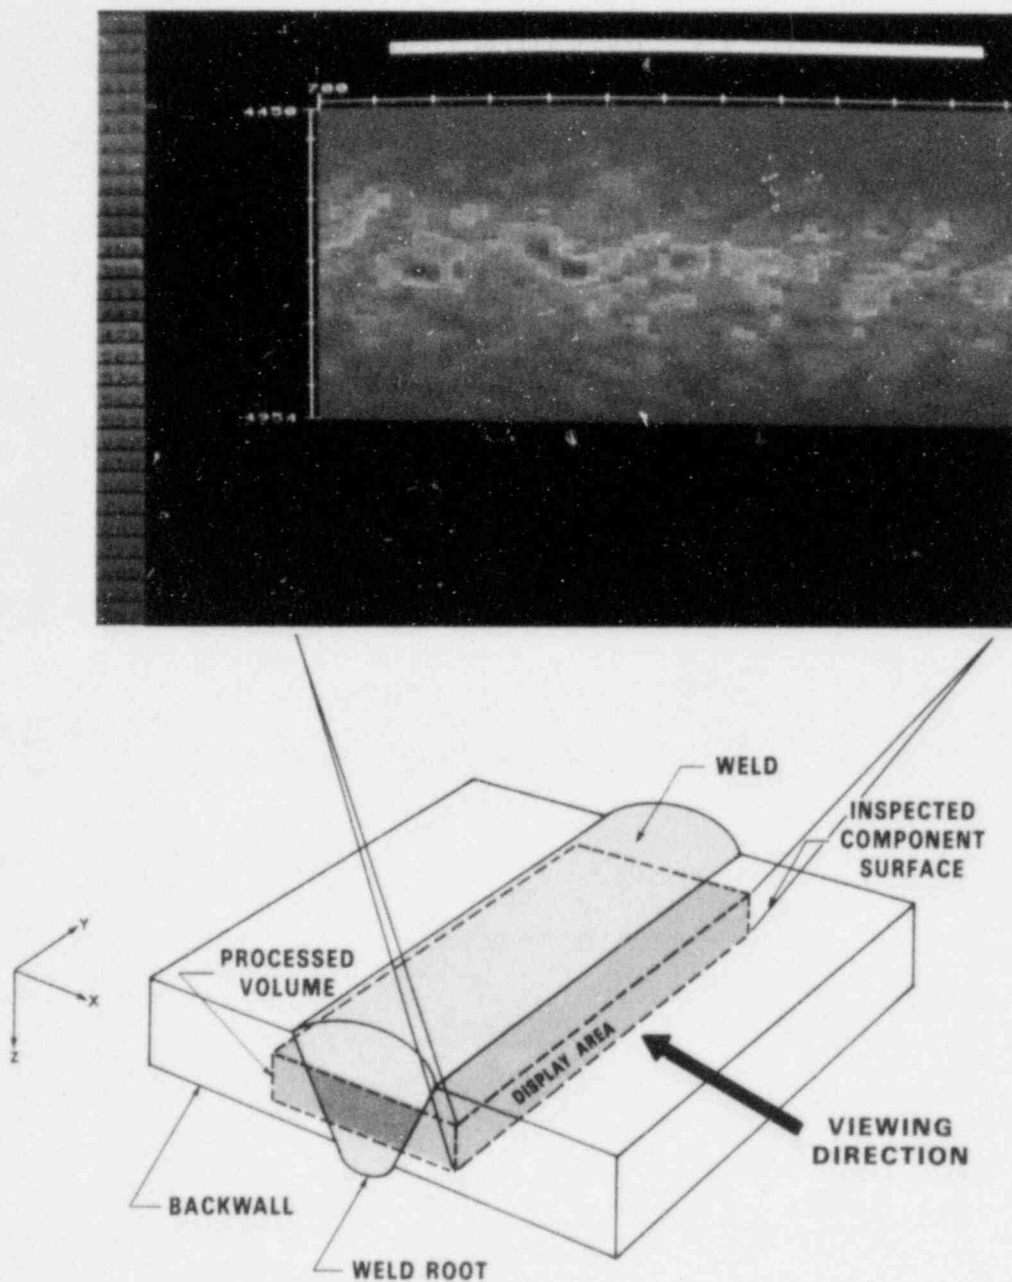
BUTT-WELDED CARBON STEEL PLATE SPECIMEN - POROSITY SECTION
